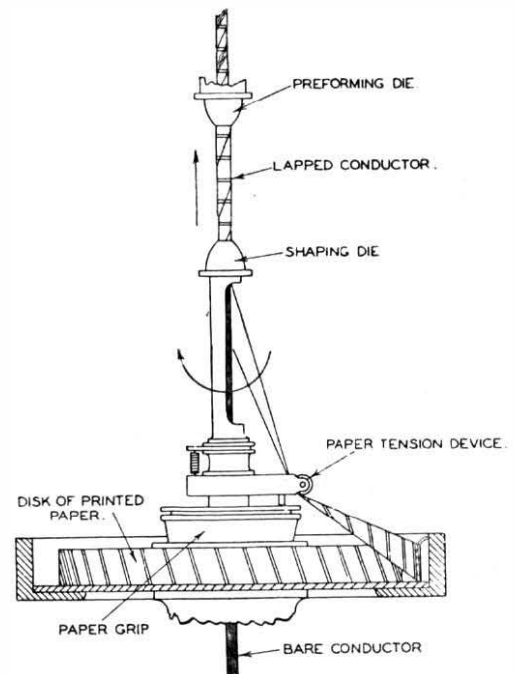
ARRANGEMENT OF PAPER LAPPING HEAD.
